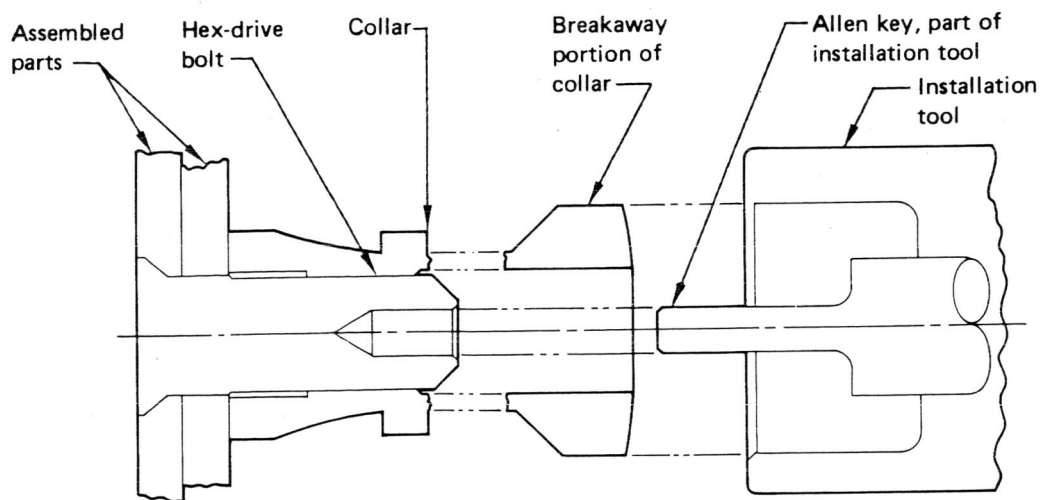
Hi-Lok Fastener Hex-Drive Bolt and Collar Installation
